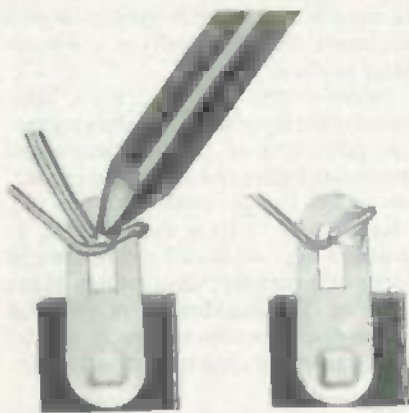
A PROPERLY-SOLDERED terminal connection looks like this.
